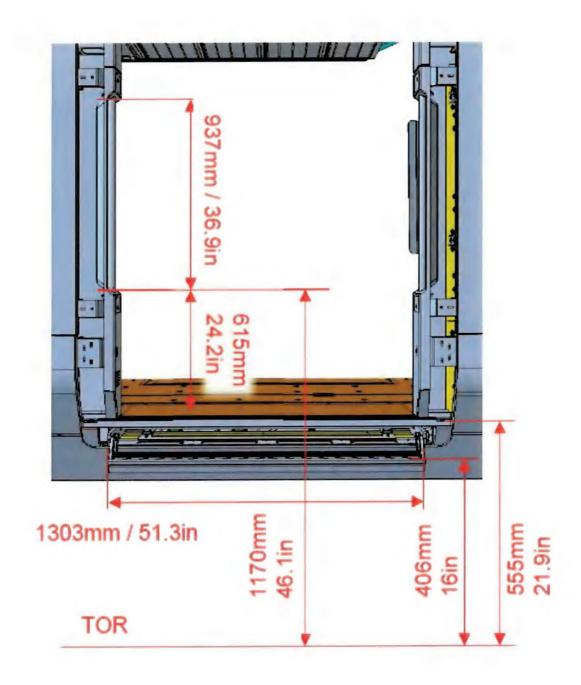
Dimensions of Side Door Step and Side Door Handholds
